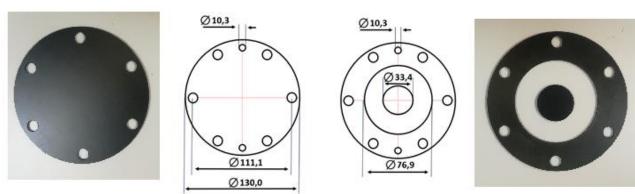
Load (left) and reference (right) samples. Dimensions in mm. ASTM D4935 standard.
